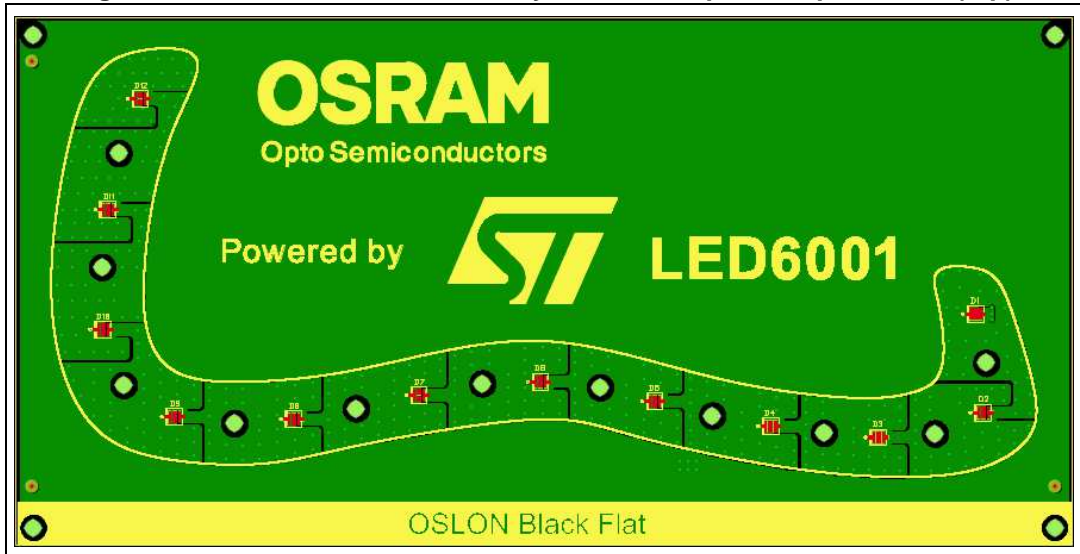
OSLON_DTRL_R board layout and components placement (bottom)
